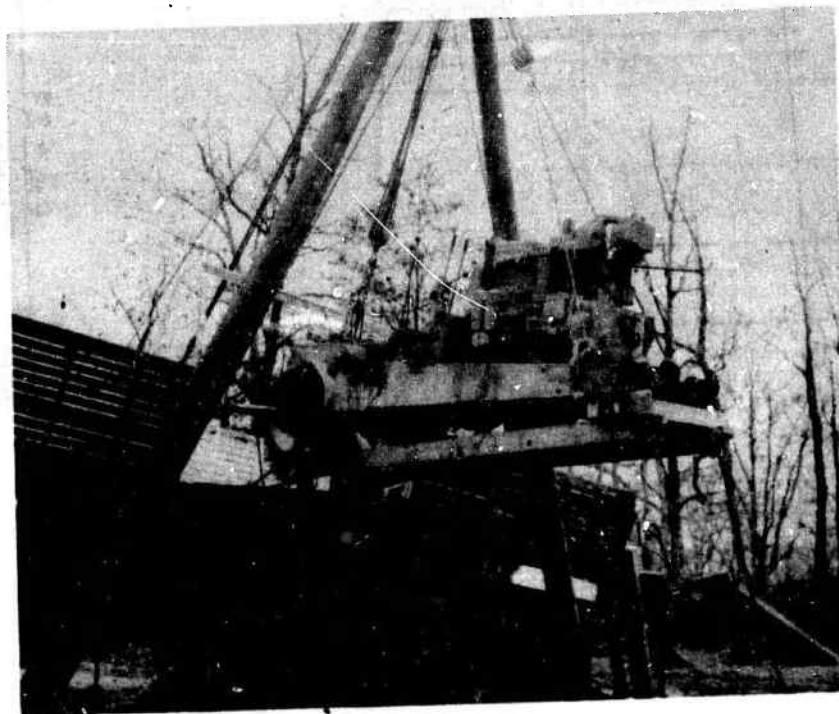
ENGINE-TRANSMISSION GROUP ON SHEARS READY TO BE TILTED INTO THE DOOR
